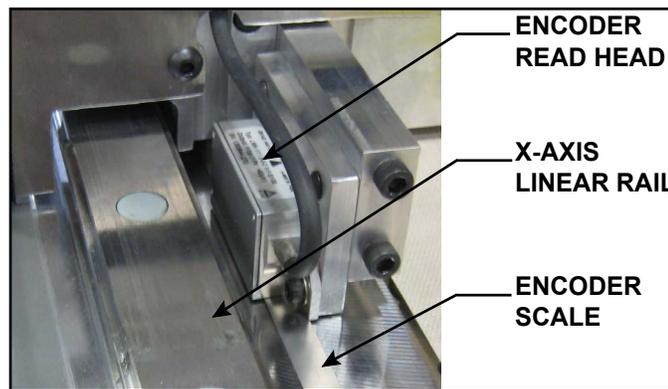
X-axis Encoder Read Head with Air Nozzle Scale Purge
